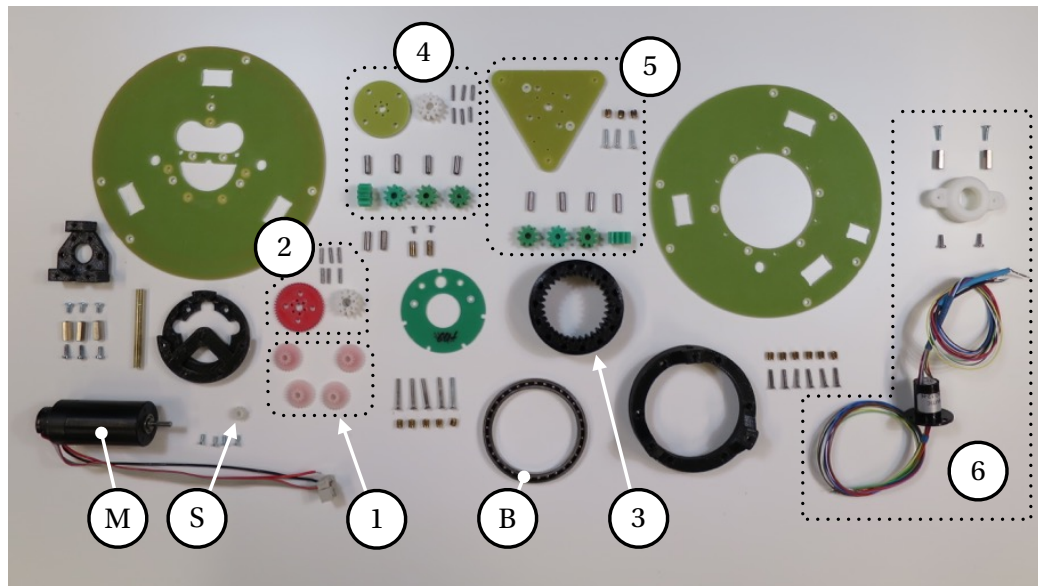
104 elements necessary to assemble Gearbox A. The labels correspond to the labels of the exploded view in Figure 4.1. Gears (S), (1), and in the assemblies (2), (4), and (5) are off-the-shelf. Annulus gear (3) is 3D printed.
